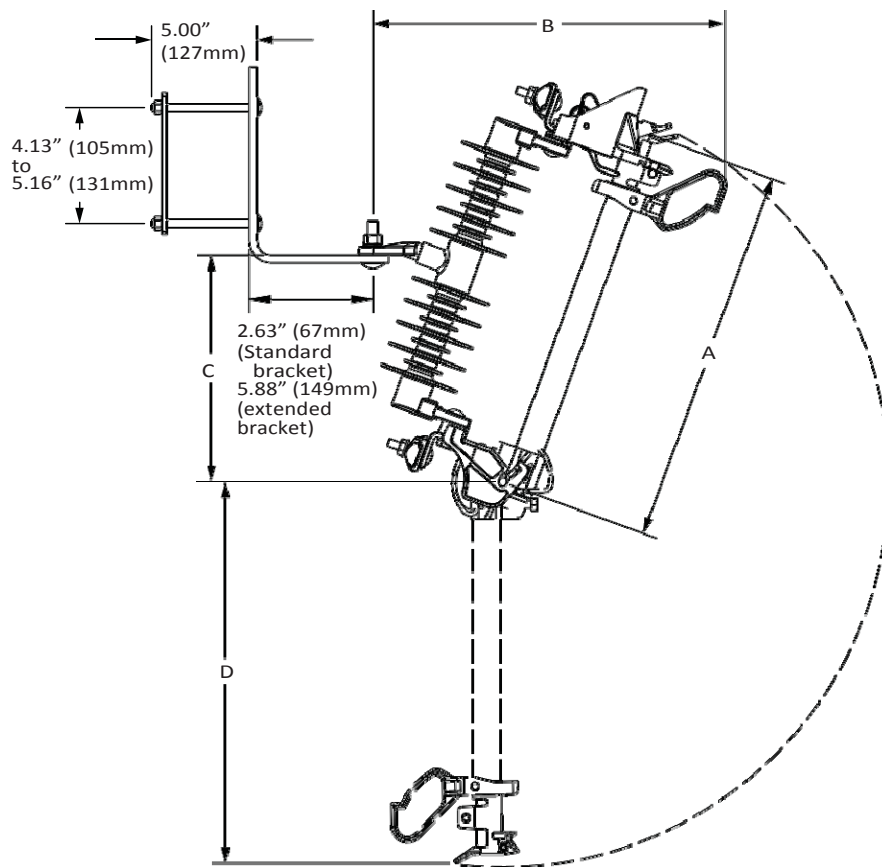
Power Fuse cutout assembly comes with standard parallel groove connectors.
